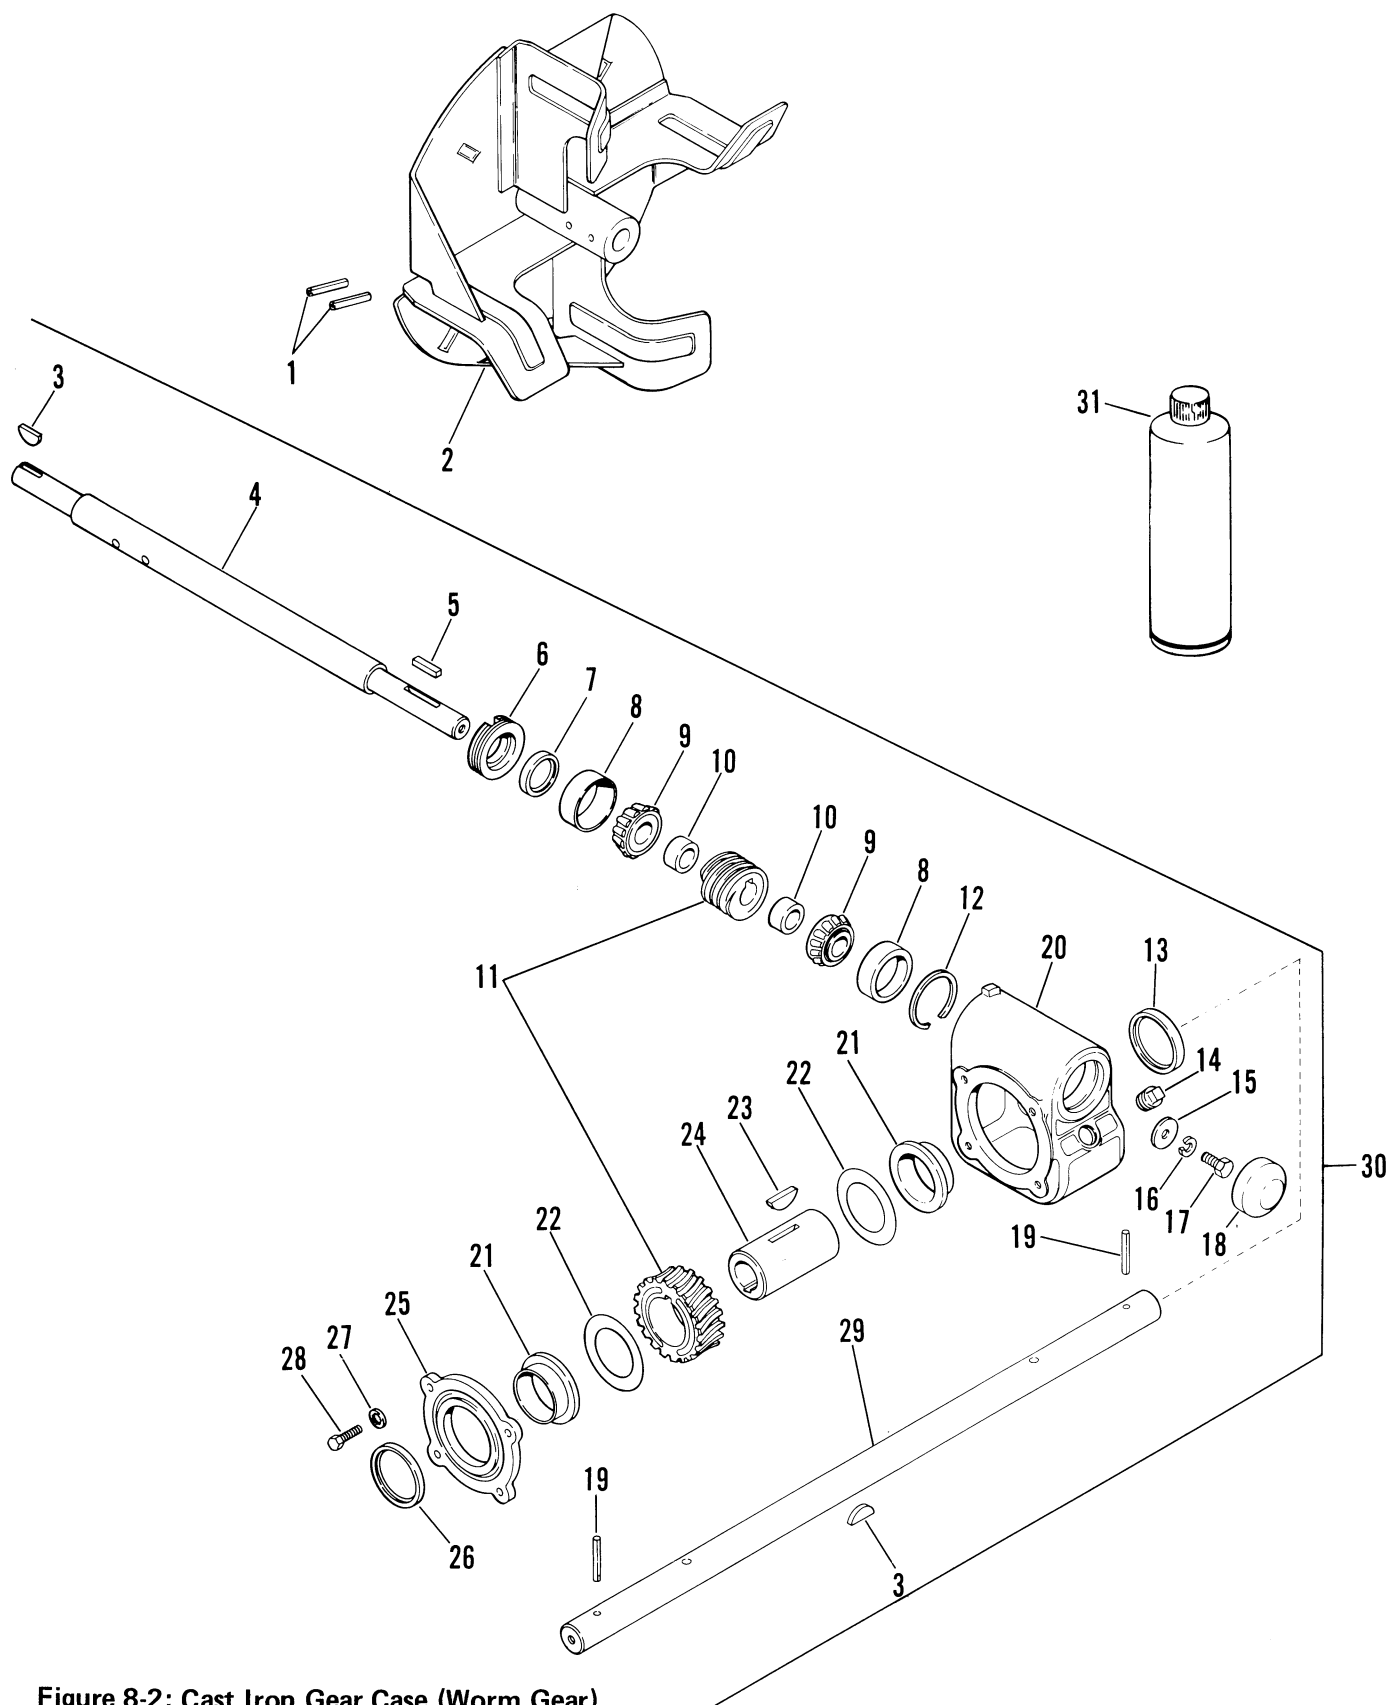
Cast Iron Gear Case (Worm Gear)
